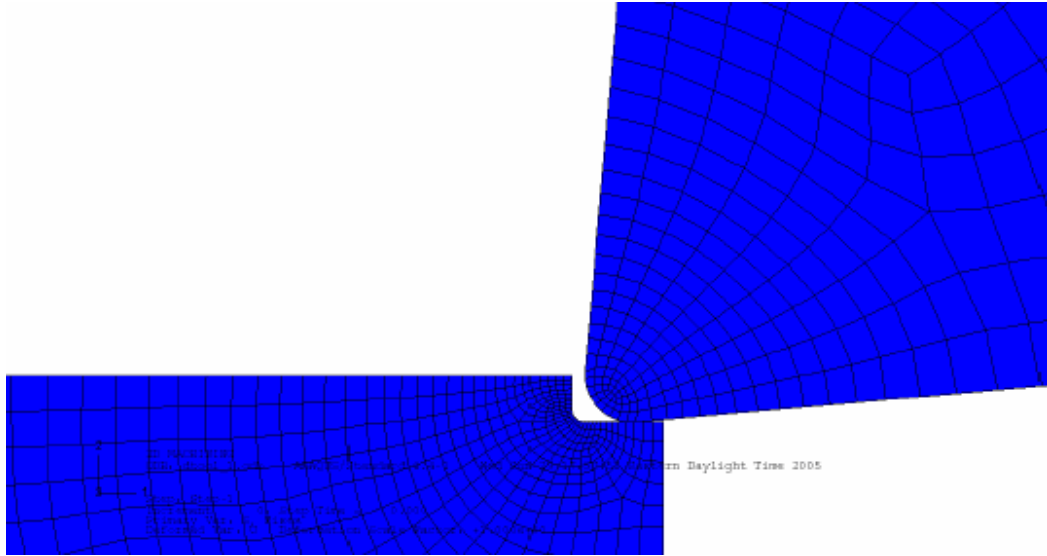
Region of workpiece showing modified initial shape for tool with a finite edge radius.
